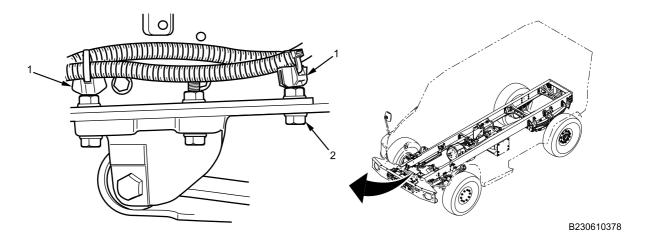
Cable Lock Strap Saddle Mounts on Right Side Radiator Support Crossmember Brace.
